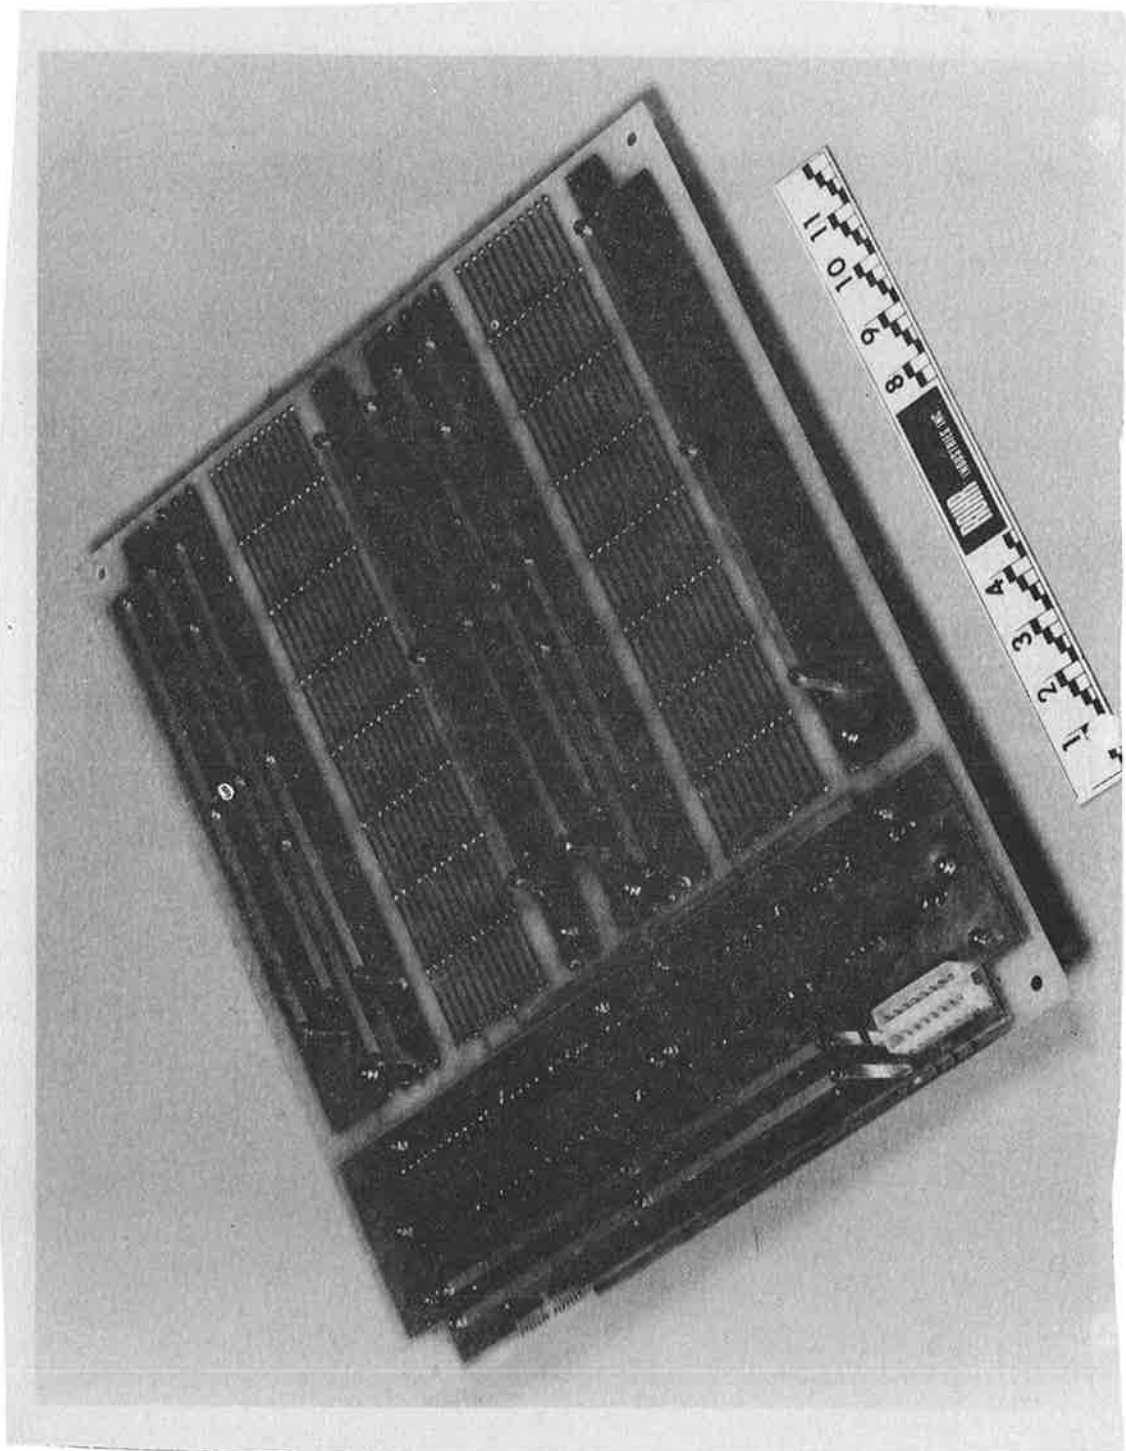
MOTHER P.C. BOARD BACKPLANE
